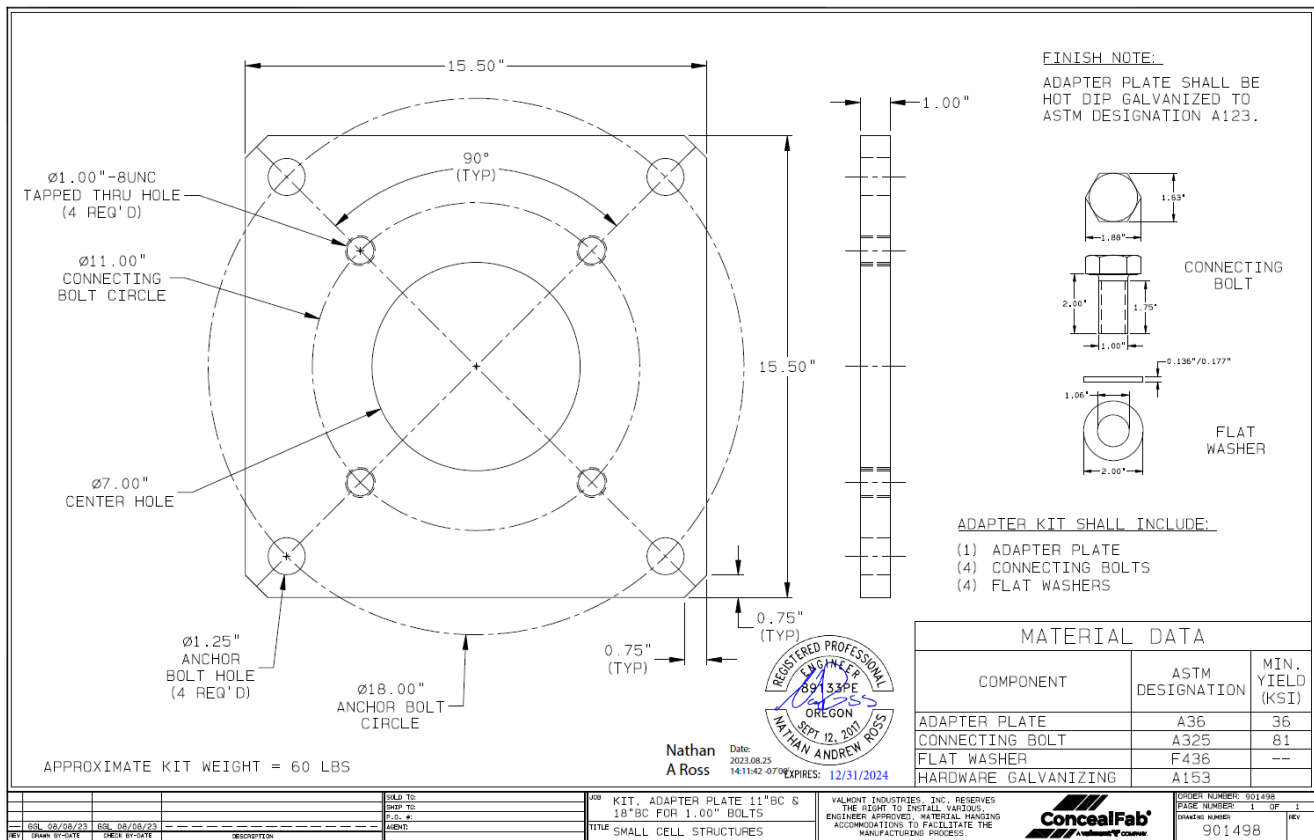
18" to 11" Adaptor Plate Engineered Drawings
